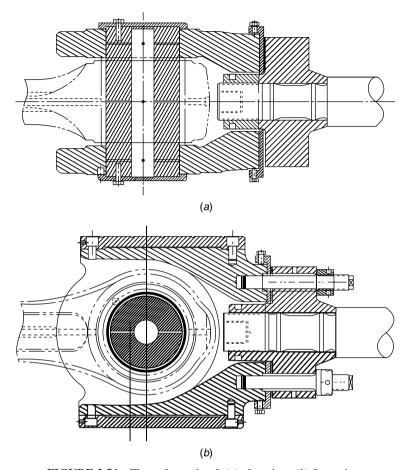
Flanged crosshead: (a) plan view; (b) front view.
